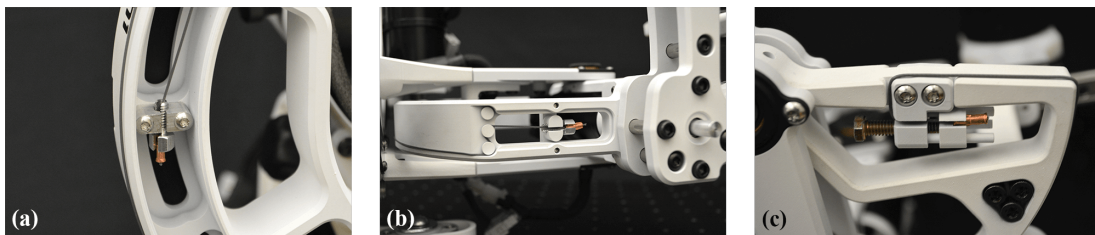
In-line cable tensioning mechanisms for each joint. All tensioners are adjustable with a standard 1/4 inch wrench when provided with pre-made cable sections and crimped on copper fittings. (a) Tensioner mechanism for PS joint (panel removed), (b) tensioner mechanism for FE joint (panel removed), (c) tensioner mechanism for RU joint.
